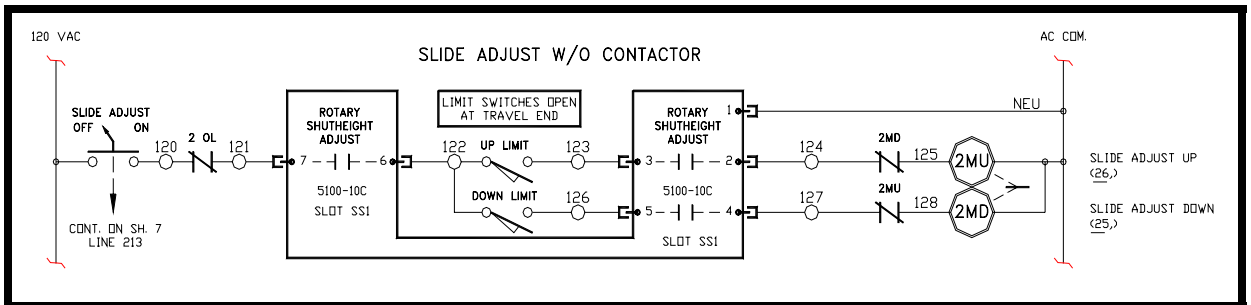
Typical Slide Motor Starter Wiring Without Auxiliary Contactor
